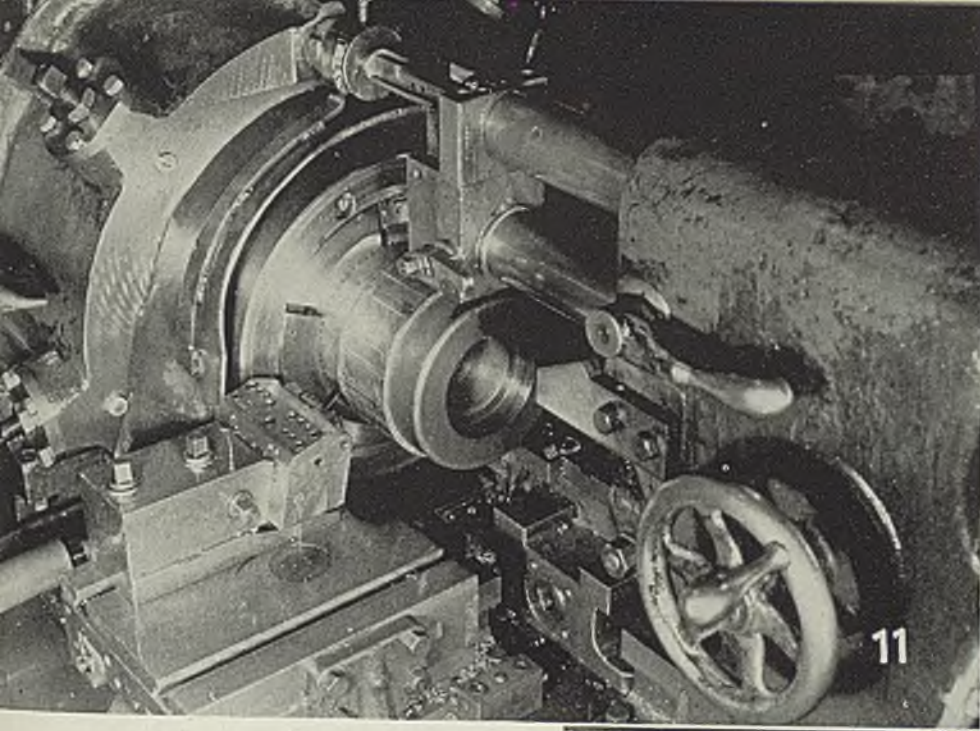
Finish turning of the copper band, grooving, undercutting and stamping are all done on the same turret lathe (shown here) but each with a different tool. The projectile is held in an air chuck as shown. The tool in the overarm turns the outside diameter of the band. When this is completed, the tool on the front slide, at the left, grooves and faces the band to length. Note how this single tool is ground to produce the finished groove contour. After grooving, the skiving tool, located on the rear slide of the lathe, undercuts the raised sealing gland of the copper band
